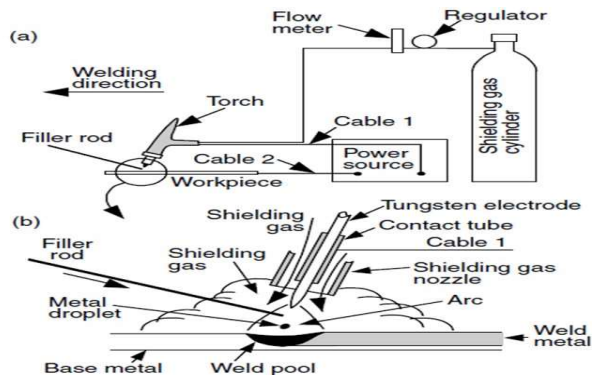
GTAW: (a) Overall process; (b) Welding area enlarged
